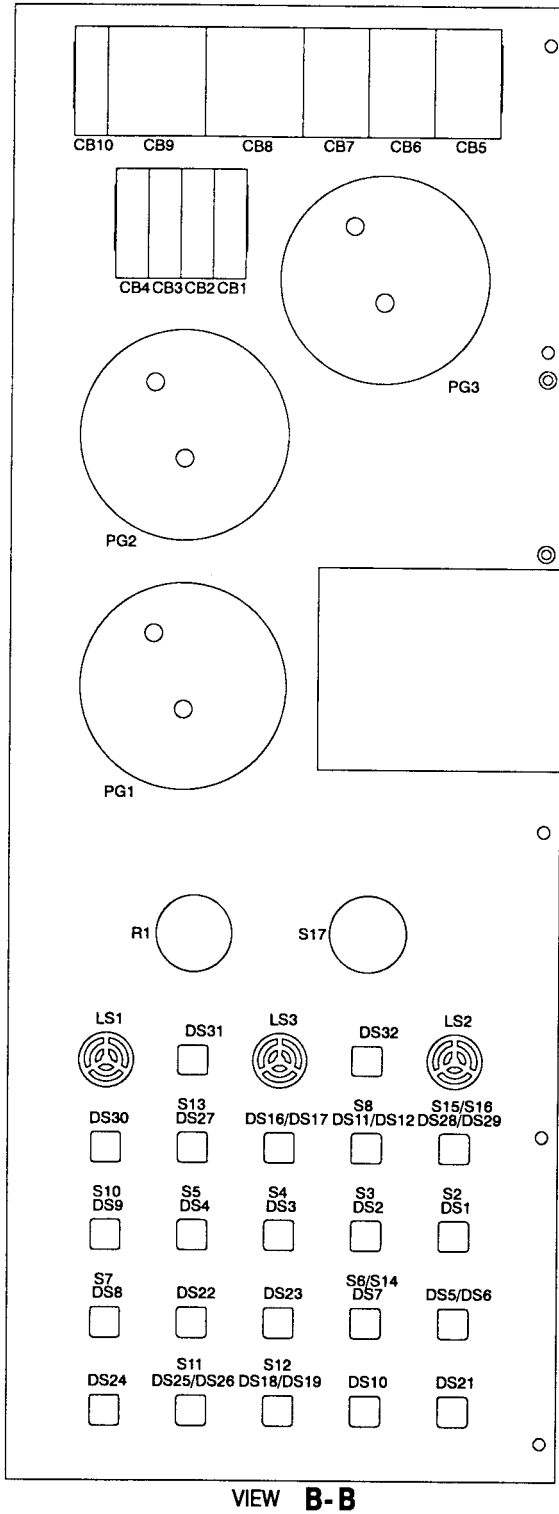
Cover Assembly Repair (Sheet 3 of 3)
